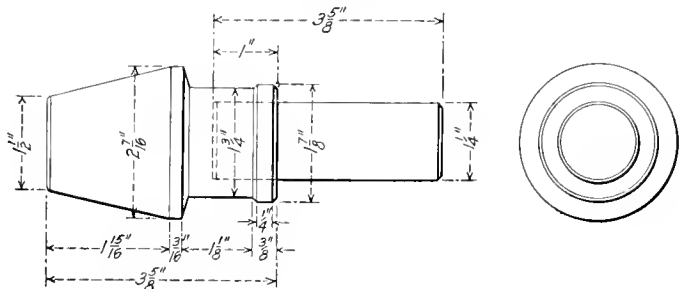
Pneumatic Tool for Flaring Boiler Tubes.
